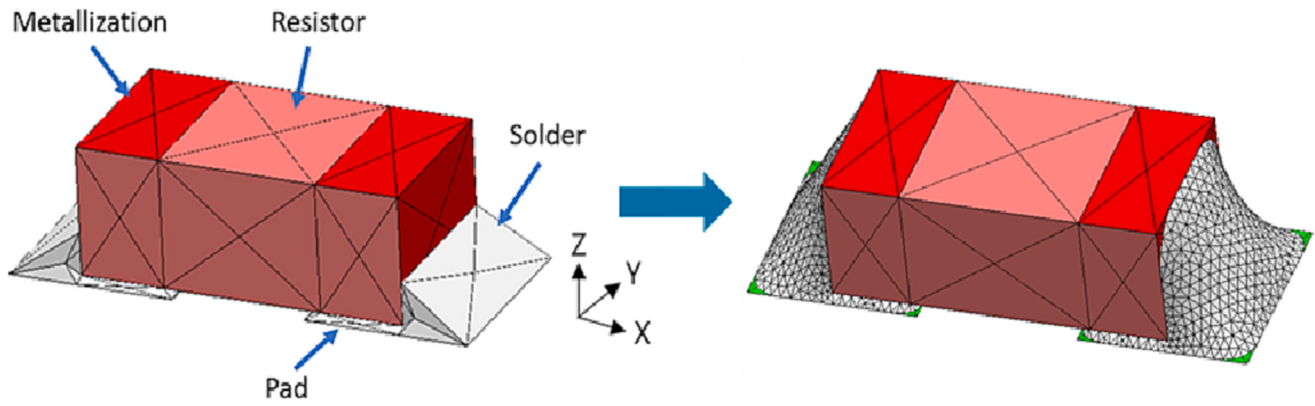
Model of chip resistor assembly in Surface Evolver.
